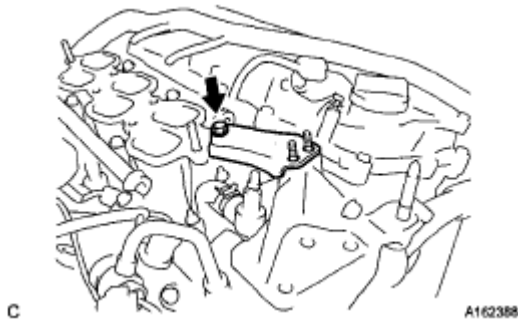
Removing Bolt And No. 2 Engine Mounting Stay RH
